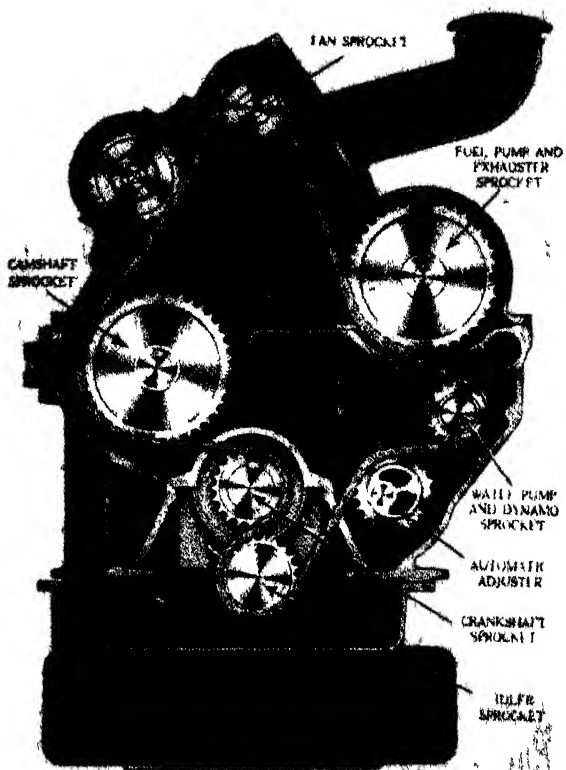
A I C Engine Timing Chain with Tensioning Sprocket
